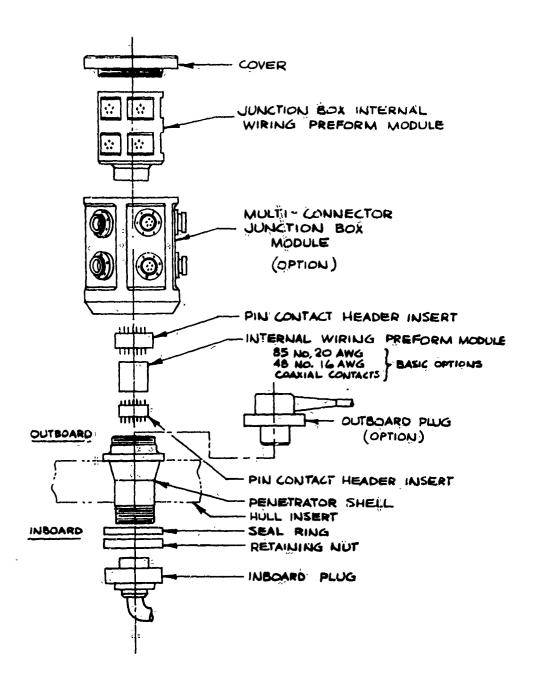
Recommended Dot Program Modular Design Hull Penetrator (Exploded View)
